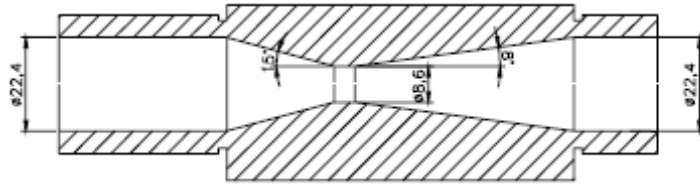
Technical Drawing of the Tested Venturi, All Dimensions in mm.
